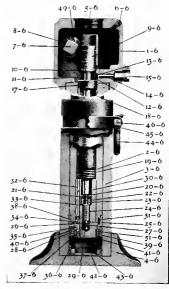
Universal Railroad Hydraulic Jack. Richard Dudgeon.
